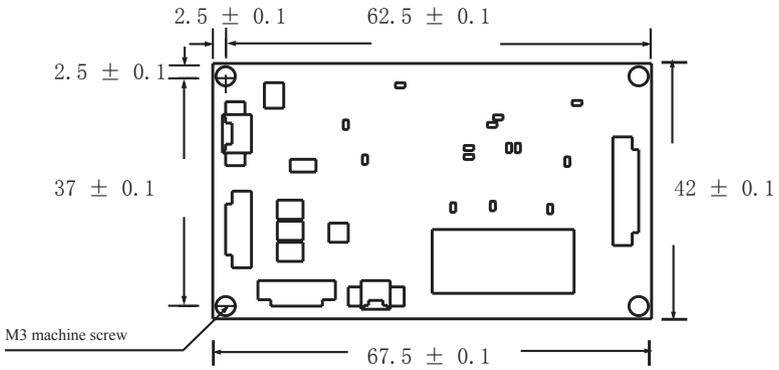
EM2027/EM2027M Decoding Board Bottom View
